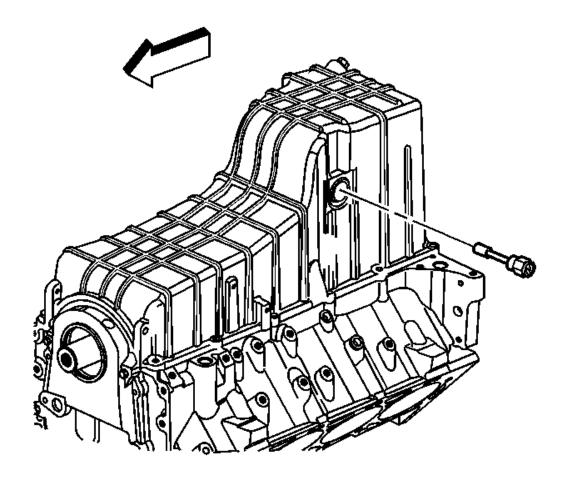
View Of Oil Level Sensor Courtesy of GENERAL MOTORS CORP.
